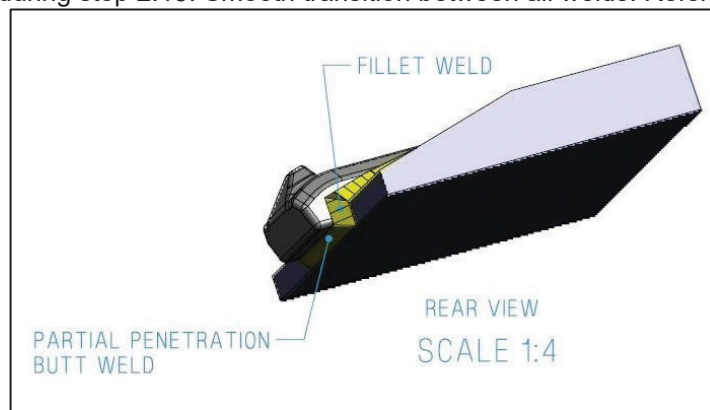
Excerpt from Weld Information drawing BU00037748
